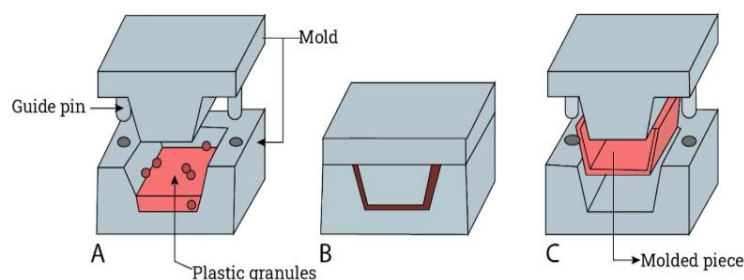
Compression Molding (Industrial Quick Search Manufacture Directory, 2024).
